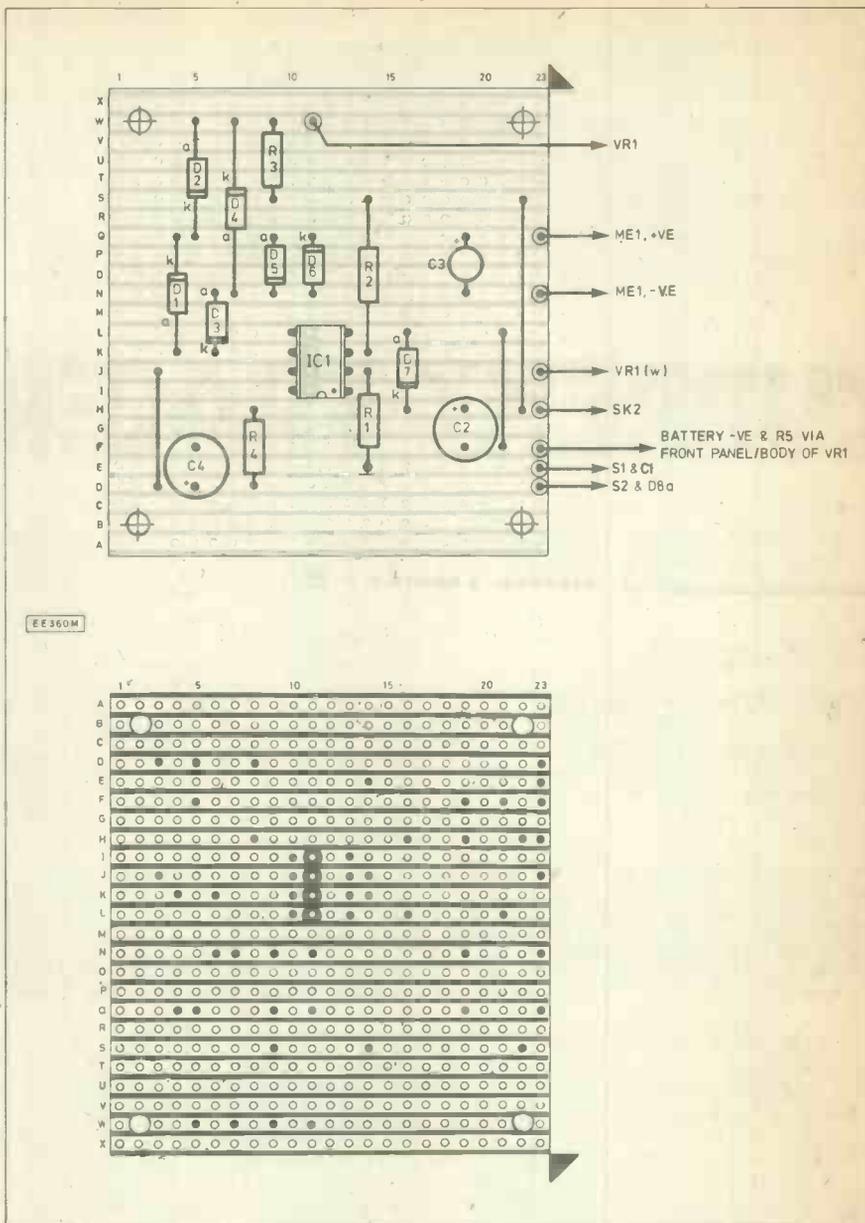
Circuit board component layout, details of breaks to be made in the underside copper tracks and wiring details to front panel. Note that an i.c. holder should be used to mount IC1 on the board. The VR1 lead marked with a "w" should be taken to the wiper or centre tag of the potentiometer.
